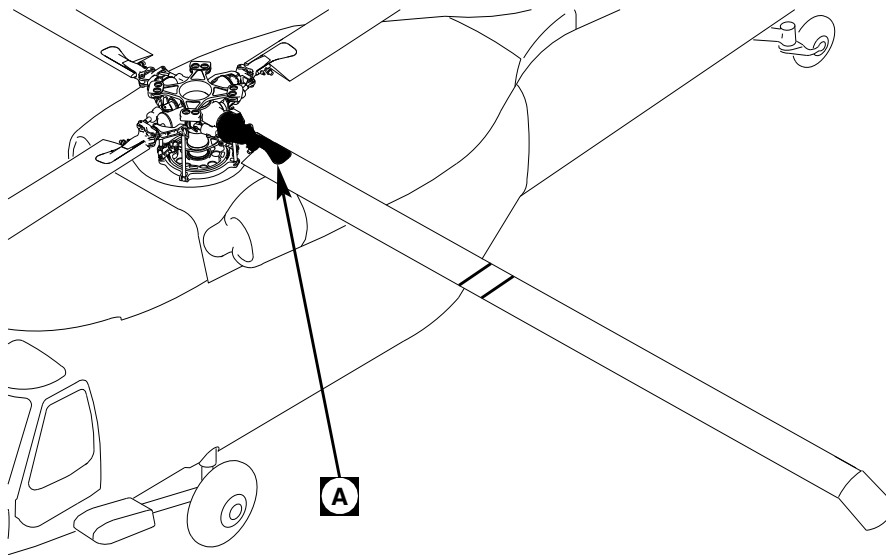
REMOVE STUCK MAIN ROTOR BLADE EXPANDABLE PIN
